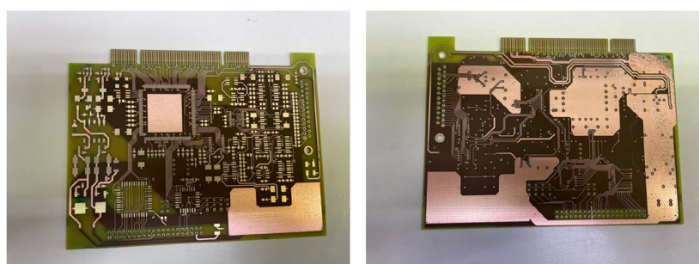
PCB after sodium hydroxide soak for solder mask removal.
